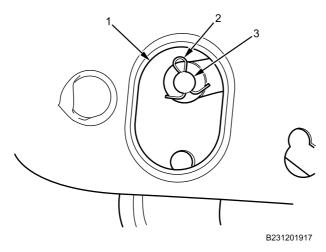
Brake Pedal Yoke Pin Cotter Pin.
